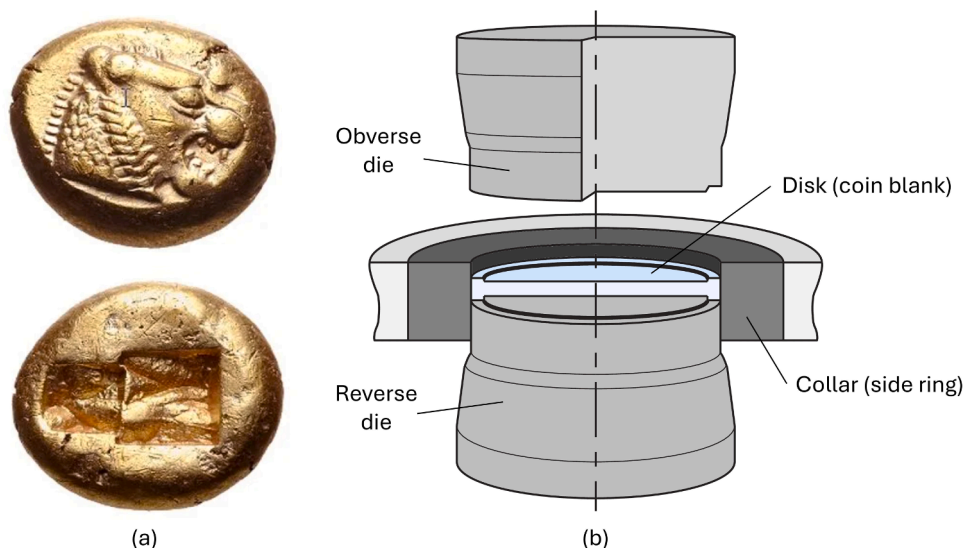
(a) The ‘Lydian Lion’ coin (adapted from Markowitz, 2017) and (b) schematic representation and notation of the active tool parts of a modern coin minting die set.
